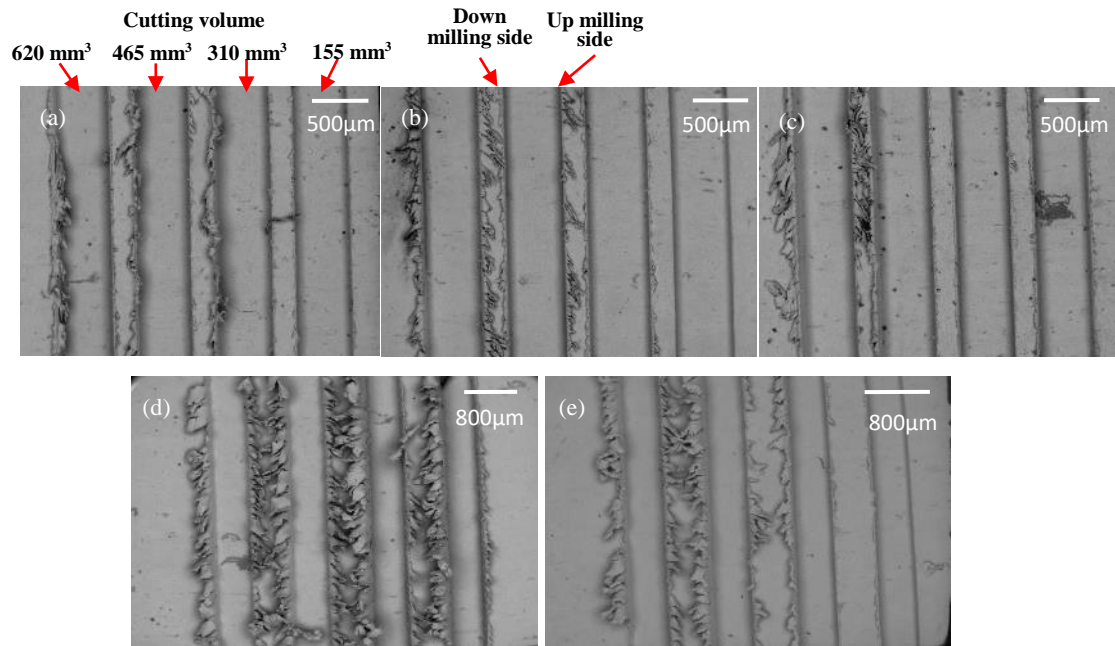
Burr formation at varying Experiment: (a) Experiment 1, cutting speed of 31.4m/min, feed per tooth of 3μm/tooth; (b) Experiment 2, cutting speed of 62.8m/min, feed per tooth of 3μm/tooth; (c) Experiment 3, cutting speed of 125.6m/min, feed per tooth of 3μm/tooth; (d) Experiment 4, cutting speed of 62.8m/min, feed per tooth of 0.75μm/tooth; (e) Experiment 5, cutting speed of 62.8m/min, feed per tooth of 1.5μm/tooth at constant depth of cut of 100 μm.
